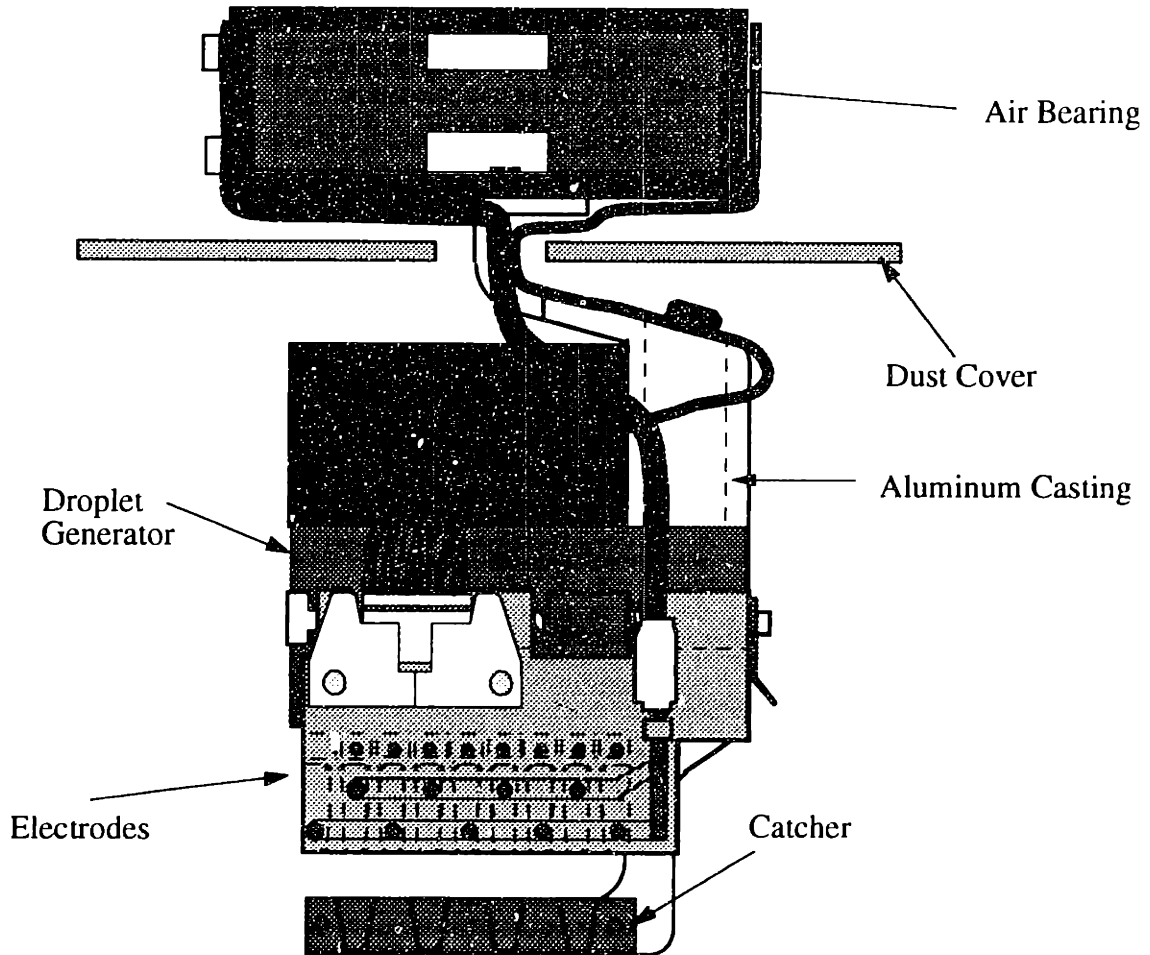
The completed printhead layout. The fast axis is oriented into the page.
